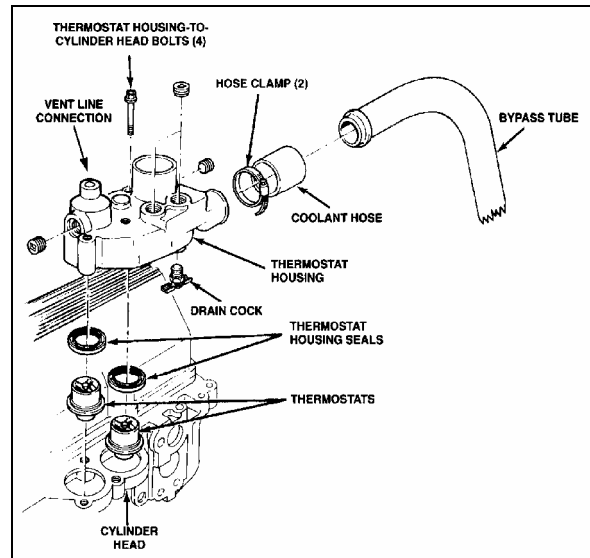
THERMOSTAT AND RELATED PARTS 05034
